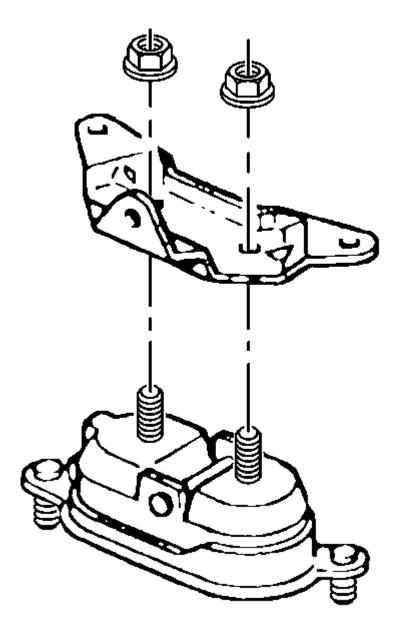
Identifying Engine Mount Upper Nuts Courtesy of GENERAL MOTORS CORP.
